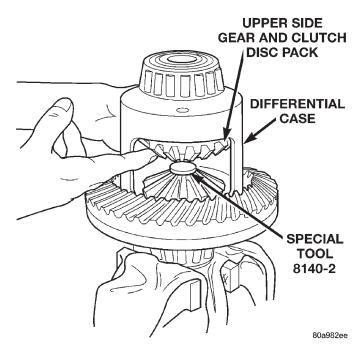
Upper Side Gear & Clutch Disc Pack Installation
